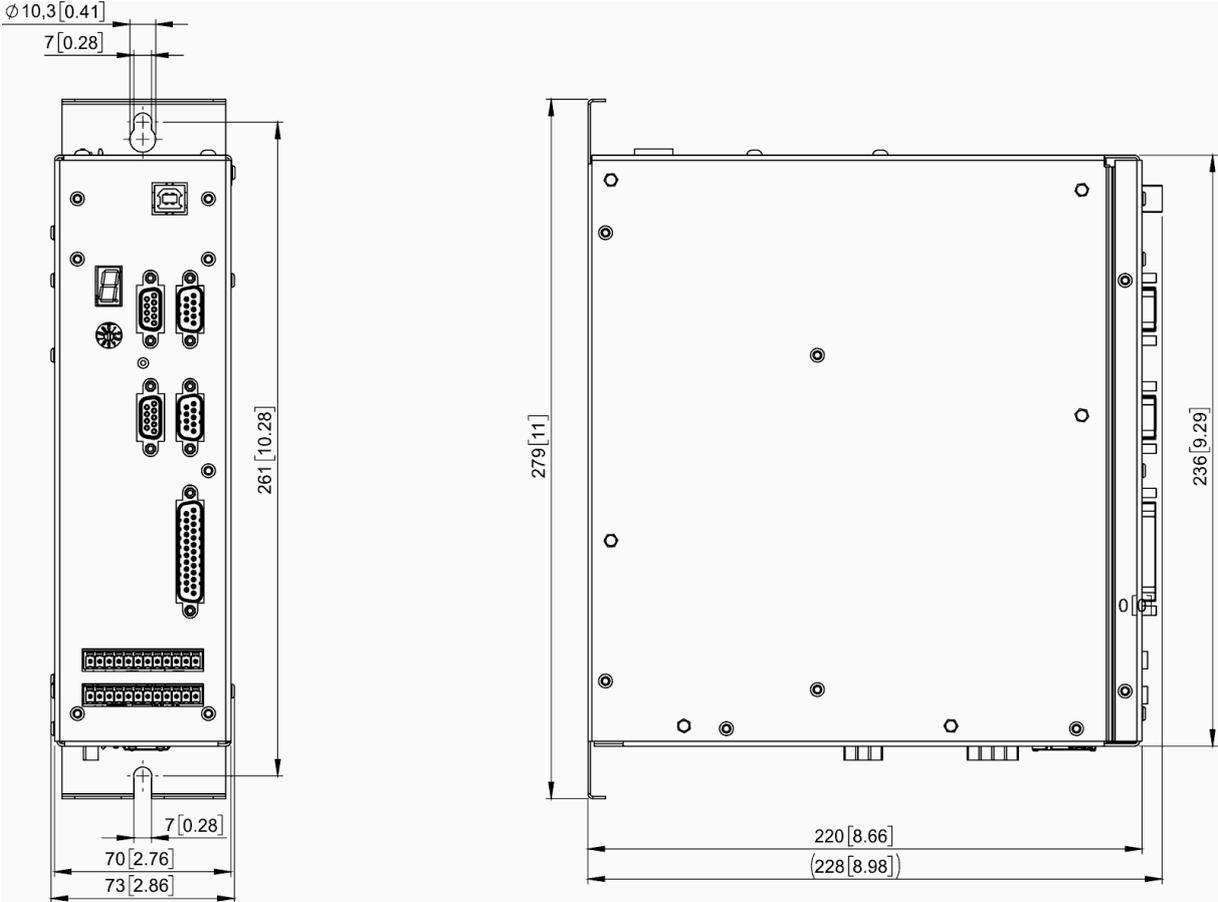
Dimensions of 0362x42DC in mm [inch]
